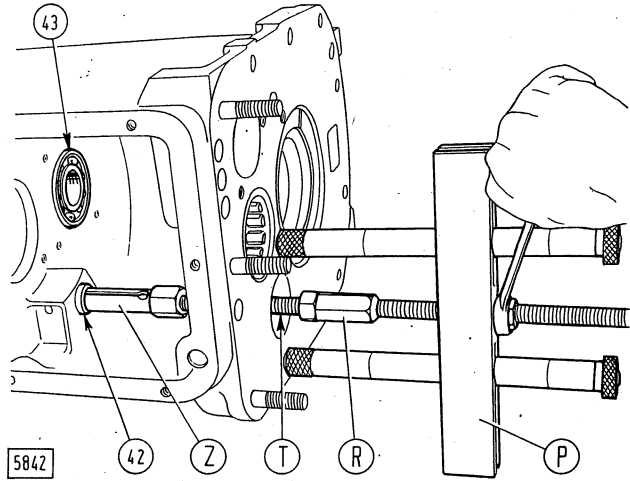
Removing the reverse gear axle needle ring (42)
